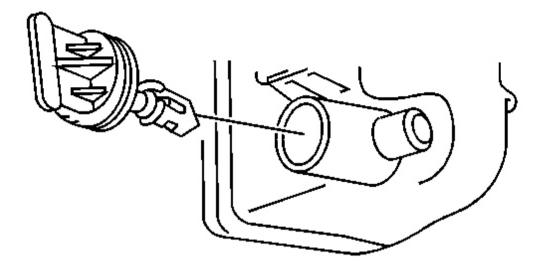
Radiator Drain Cock Courtesy of GENERAL MOTORS CORP.
